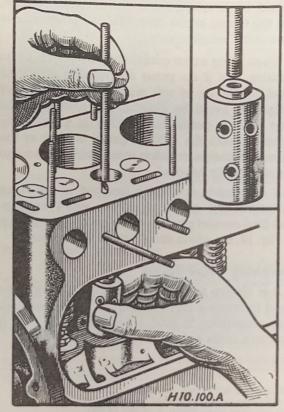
Showing a tappet being lifted out with the aid of a length of screwed rod.
